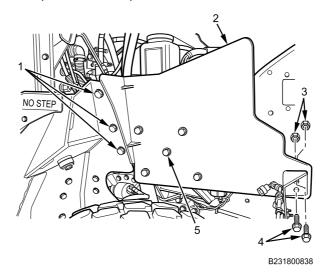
Right Side Engine Armor Plate (Mounting Bracket Hidden).
